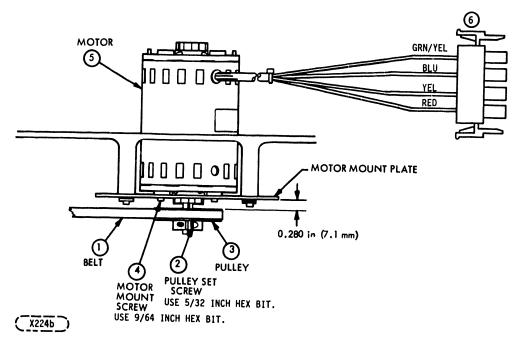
DRIVE MOTOR ASSEMBLY
